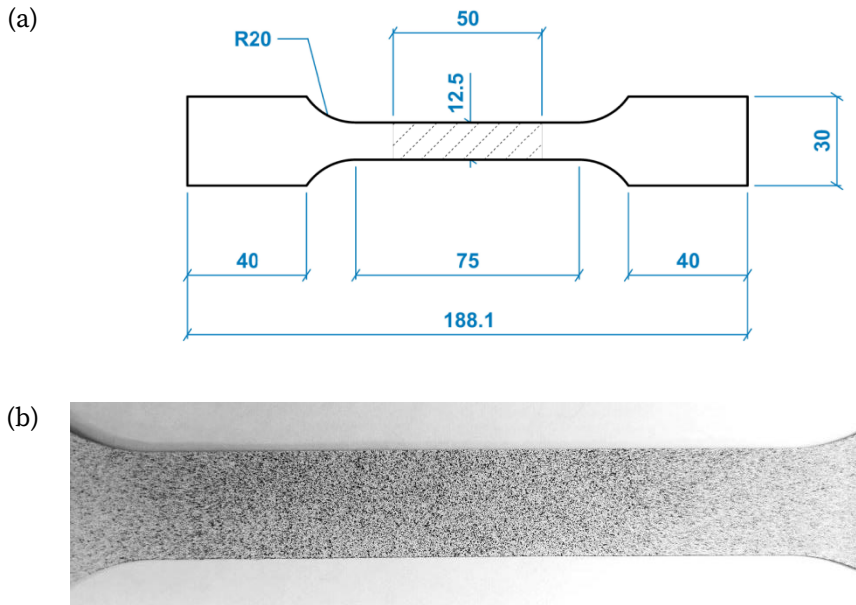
Dog bone-shaped specimens for quasi-static uniaxial tensile test on the stainless steel sheet. (a) Geometry and nominal dimensions (in mm) as per the ISO standard (ISO 6892-1), (b) zoom on a test specimen prepared with speckle pattern for DIC strain monitoring.
